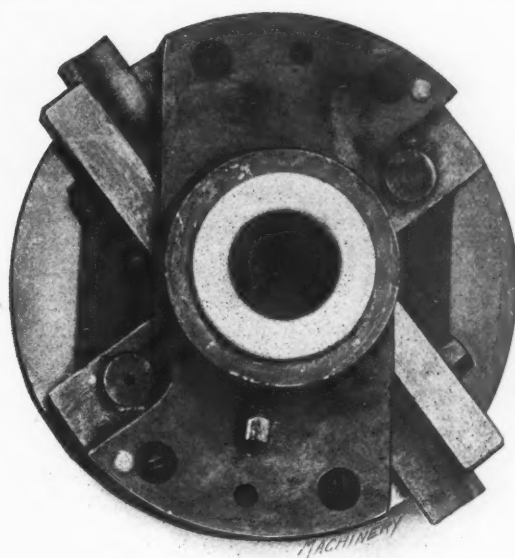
Bolt Pointer for use on Victor Nut Facing Machine
